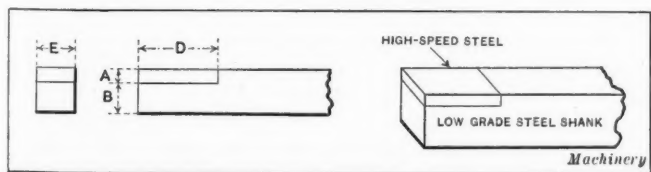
Fitting High-speed Steel Pieces to Low-carbon Steel Shanks
